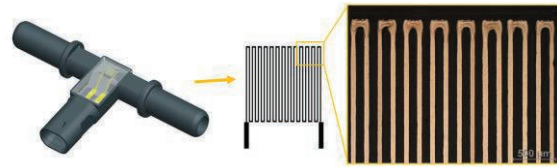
Inkjet printed resistive temperature sensor on injection molded fluidic device [13]
